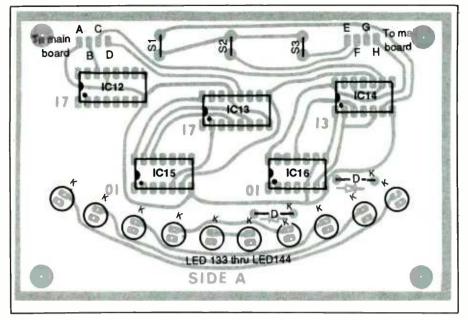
Wiring guide for the pendulum board, viewed from the component side.
